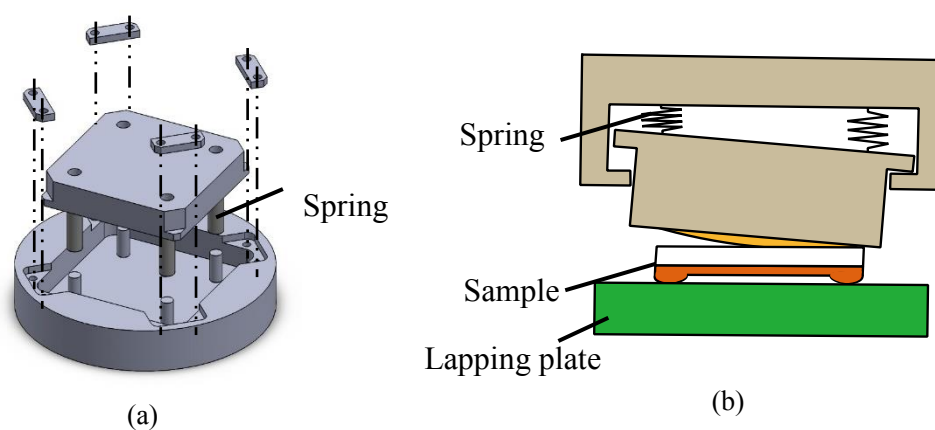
(a) Jigs for CMP and (b) mechanism of correction of parallelism
